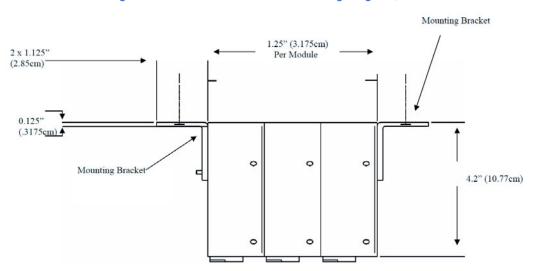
External I/O Modules Mounting Diagram, Overhead View
